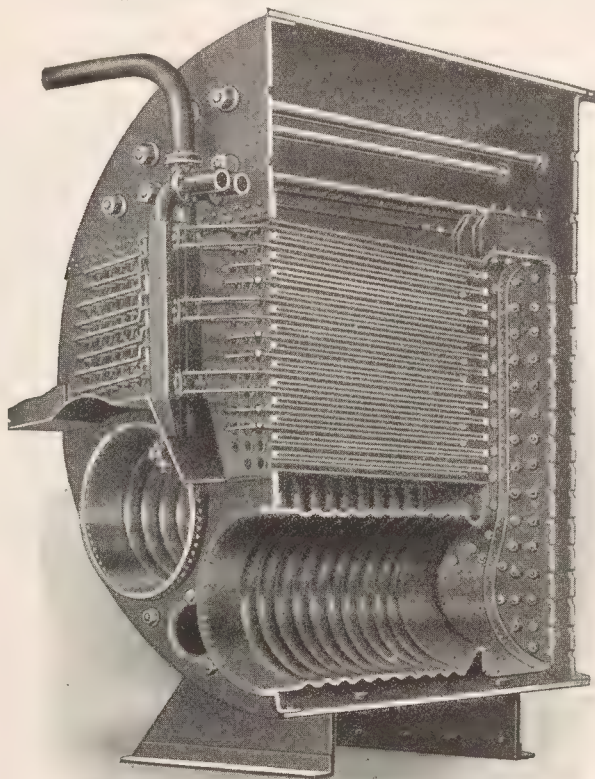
Sectional View of Internally Fired Marine Boiler, Showing Location of Superheater Elements in Fire Tubes.
